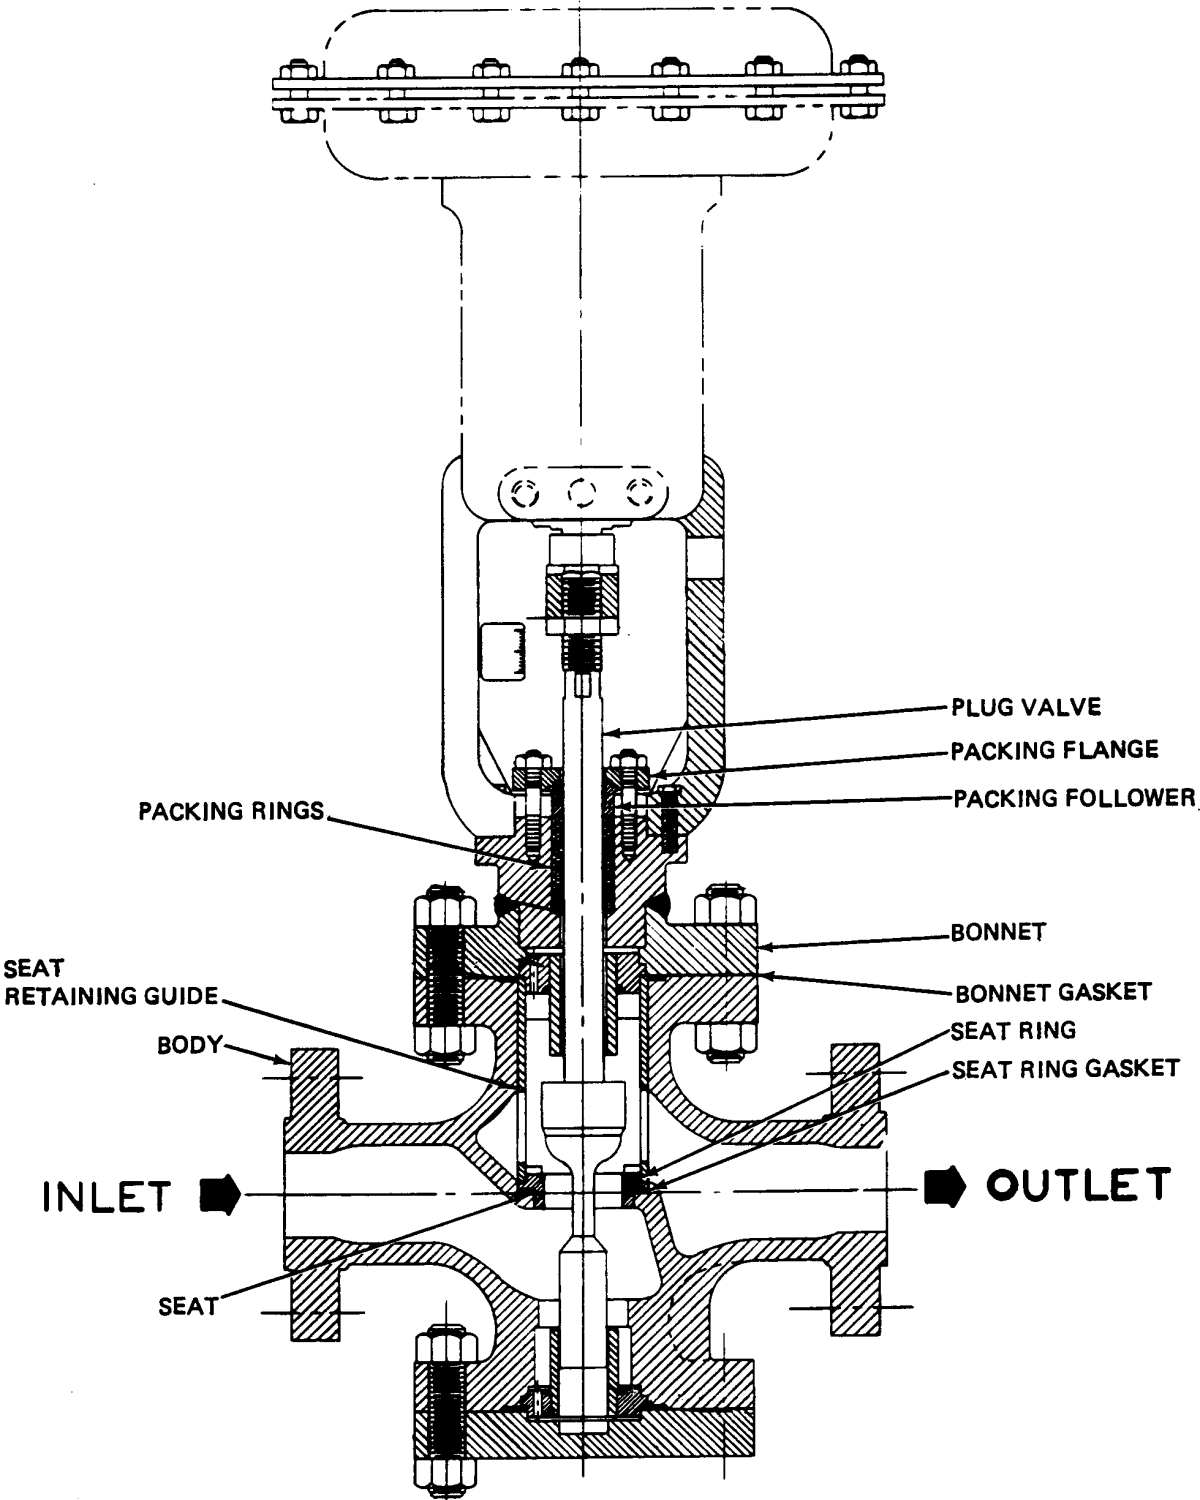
Diaphragm-Actuated Pressure-Reducing Valve (Leslie 22388N)
